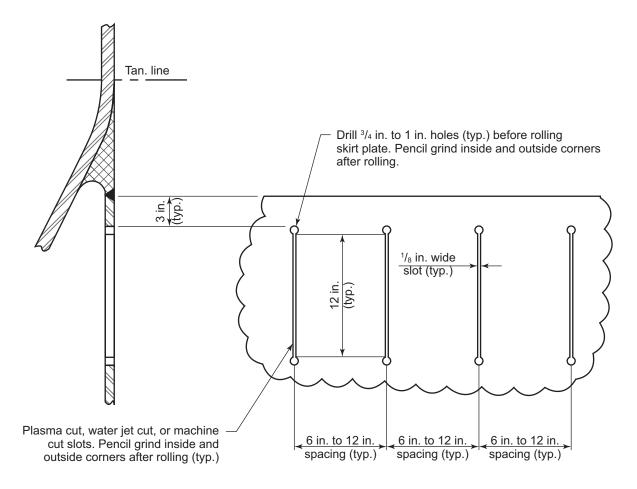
Typical Details for Coke Drum Skirt Keyholes
